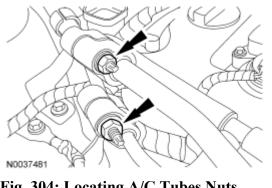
Locating A/C Tubes Nuts Courtesy of FORD MOTOR CO.
